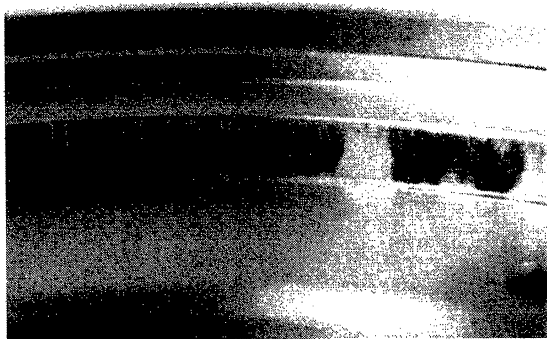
Roughened black mark on the OLD flange/bearing flange interface of the SADM.
